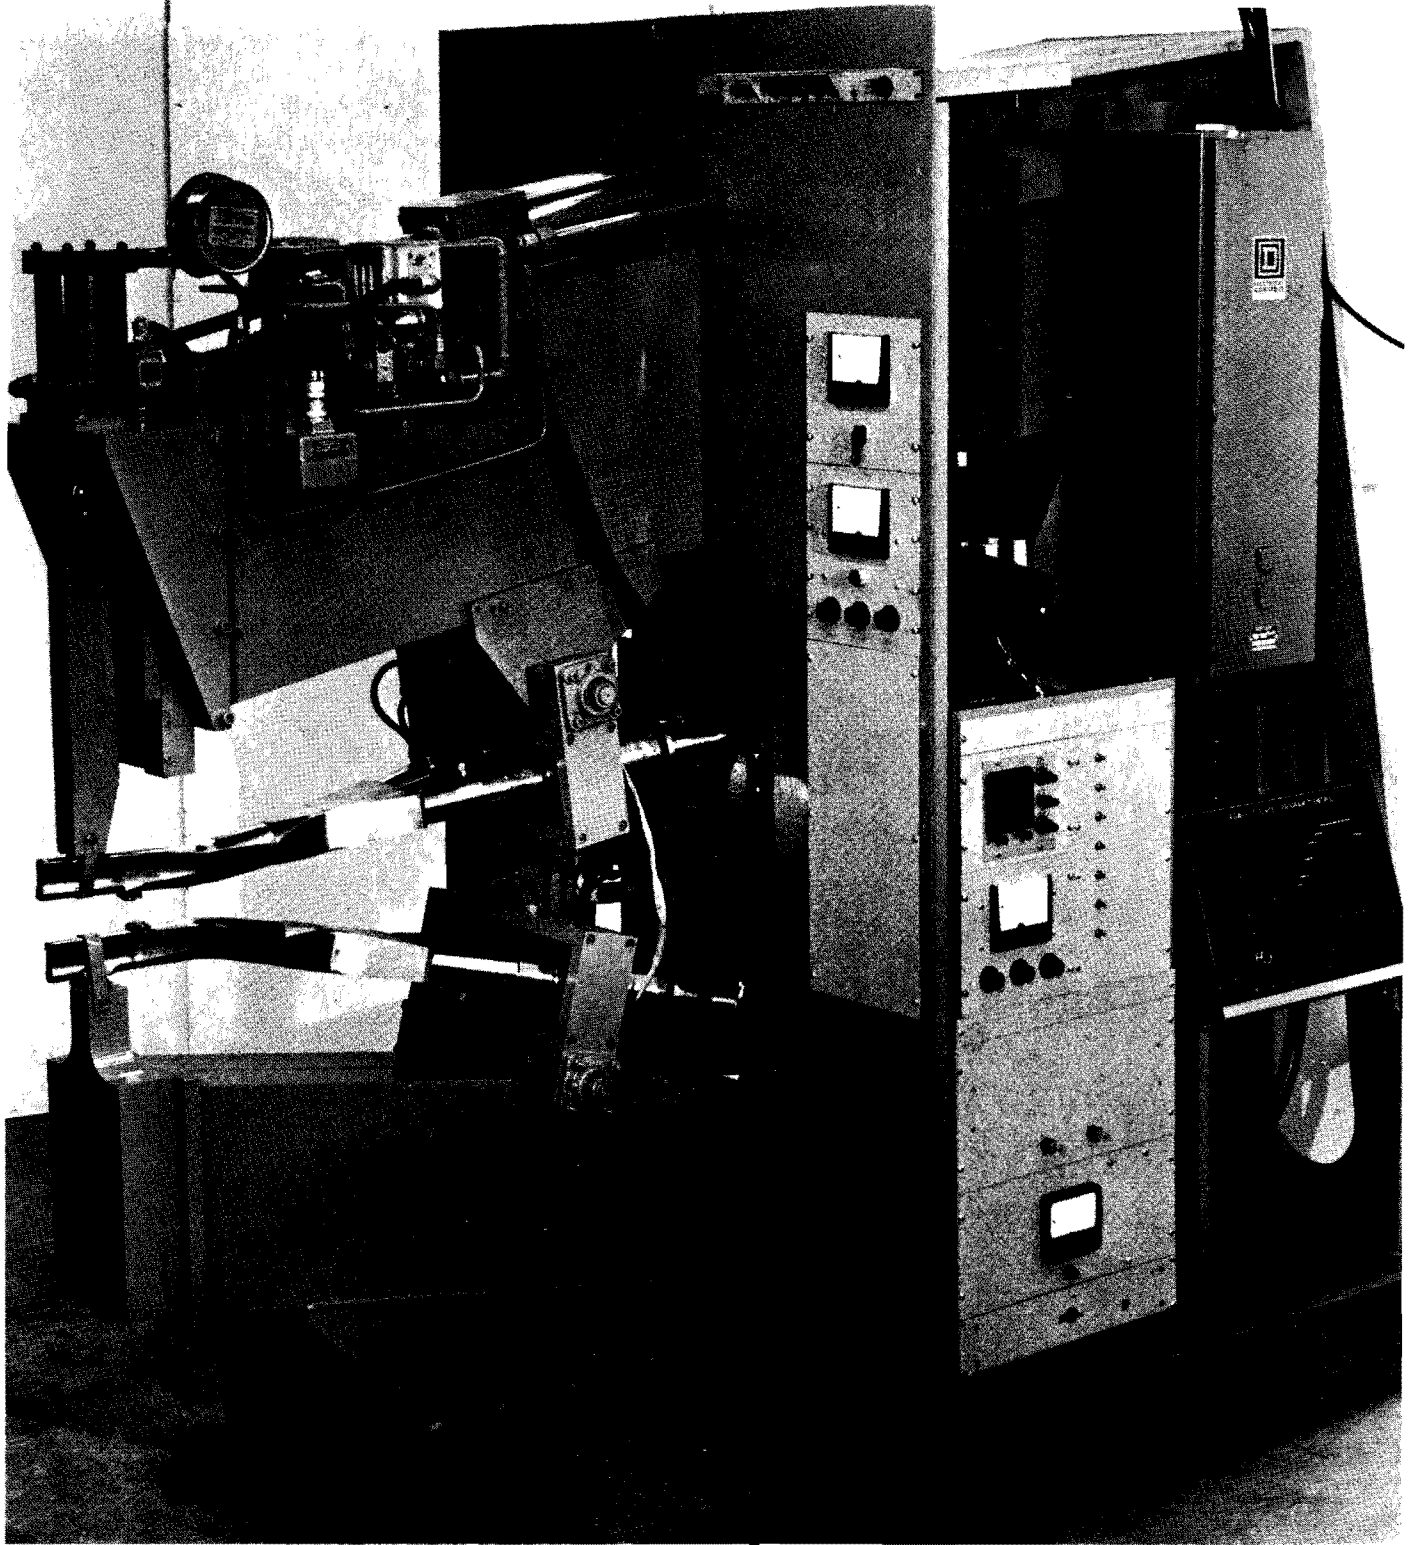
25-kw Ultrasonic Welding Machine Developed on the Program
